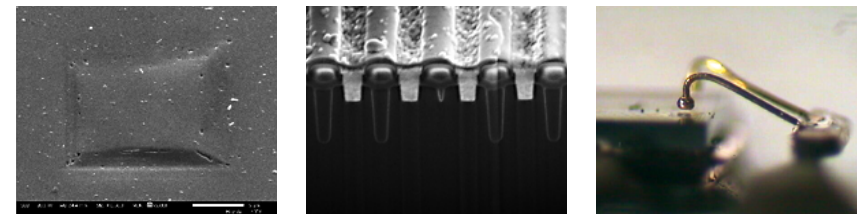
| Potential failure modes might be caused by manufacturing: broken wedge (left), package crack.
